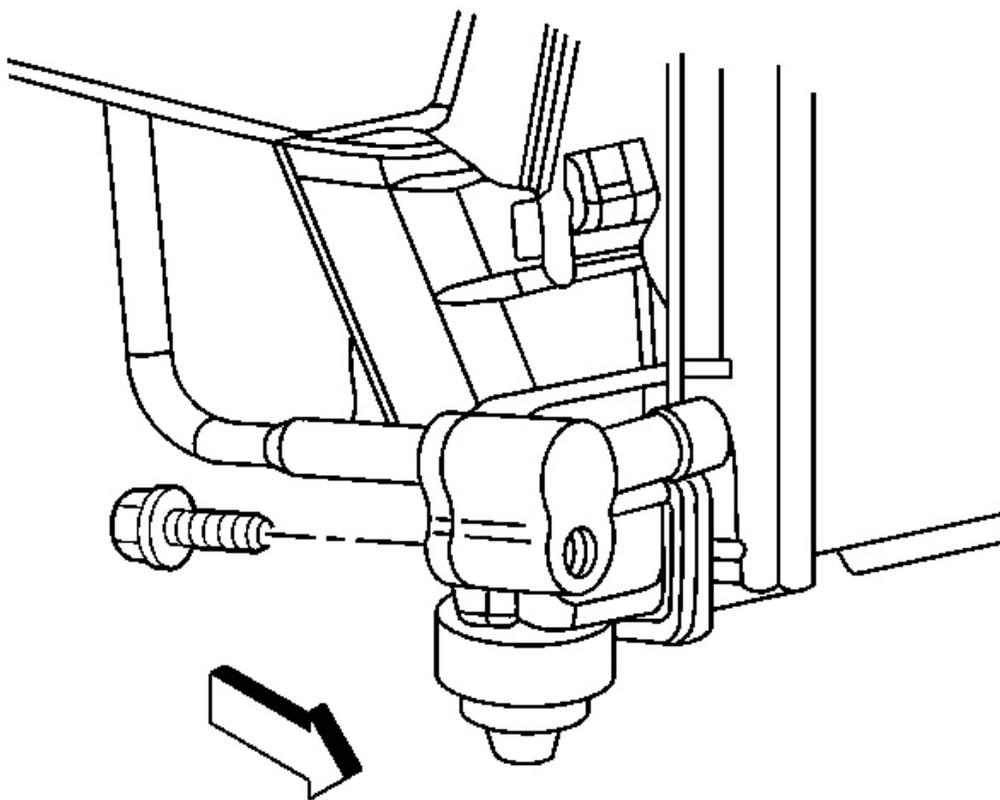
Identifying Front Evaporator Inlet Line To A/C Condenser Lower Bolt
